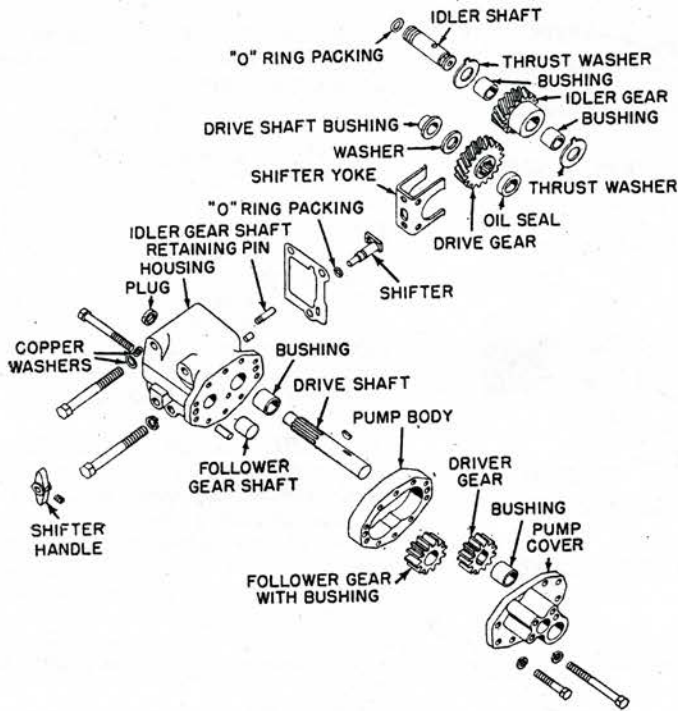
A Exploded view of Powr-Trol pump. Models 50, 60
